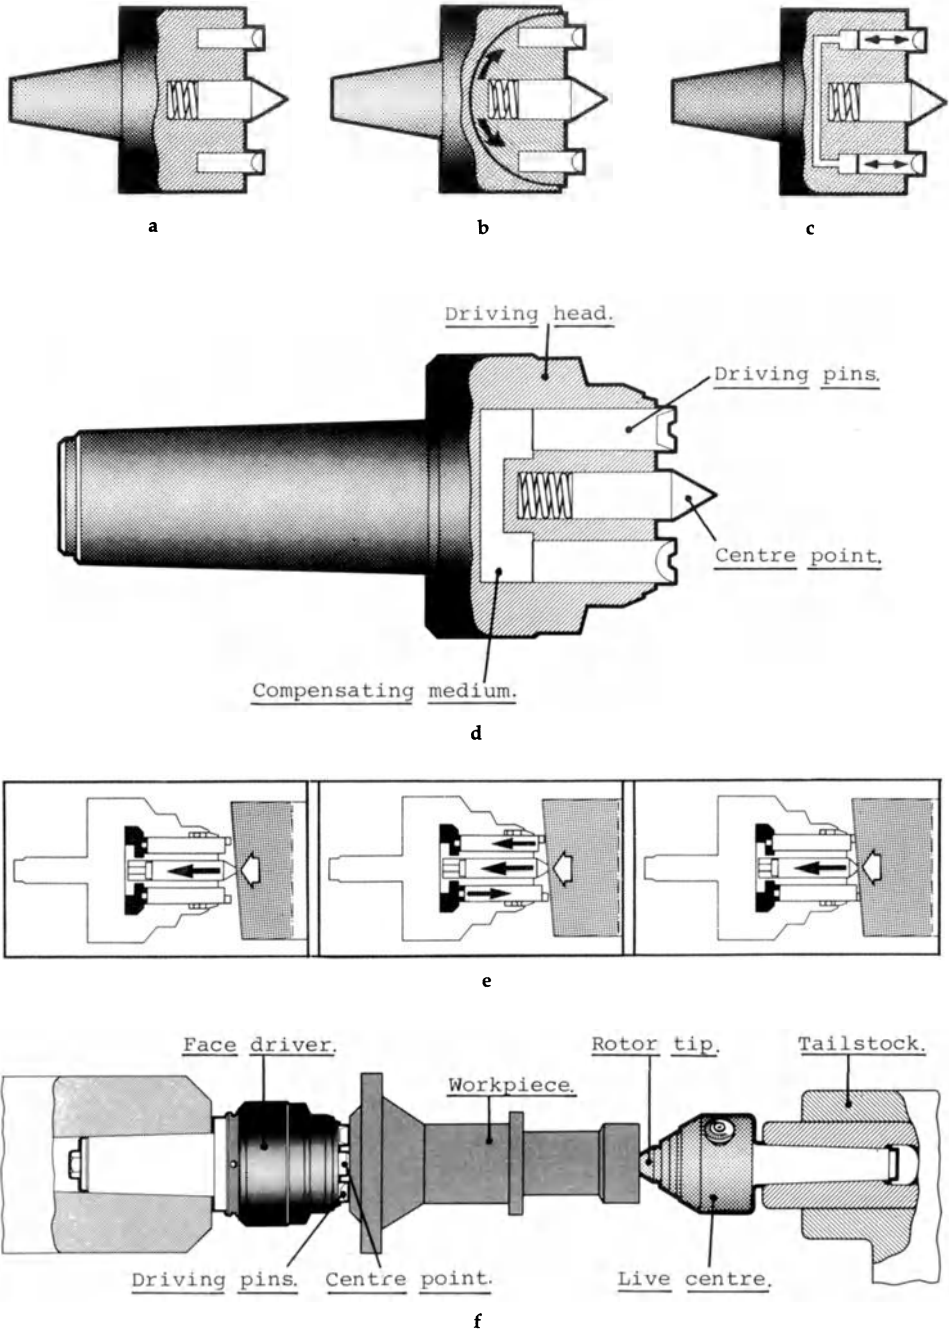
Typical face drivers in turning operations. a Face driver with fixed driving pins. b Face driver with fixed driving pins on a floating cup-shaped plate. c Face driver with axially (i.e. “floating”) moveable driving pins. d Detail of type c. e Typical applications. f General arrangement of setup. [Courtesy of Sandvik (UK) Ltd.]
